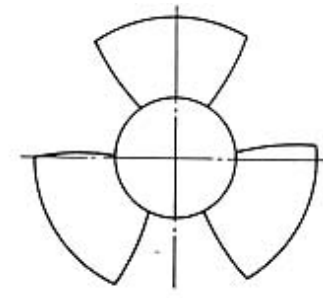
Helical impeller illustrated to underline the difference between a closed and an open impeller, a single and a double suction impeller
